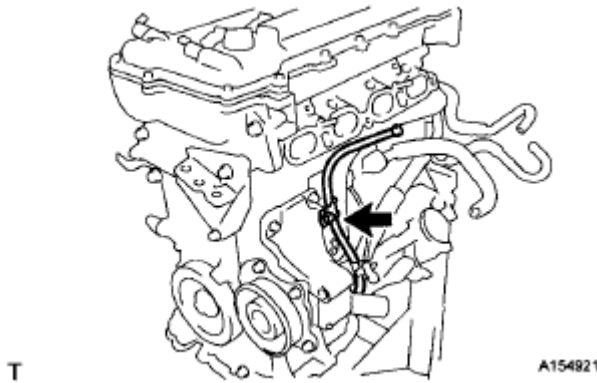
Locating Oil Level Dipstick Sub-Assembly
